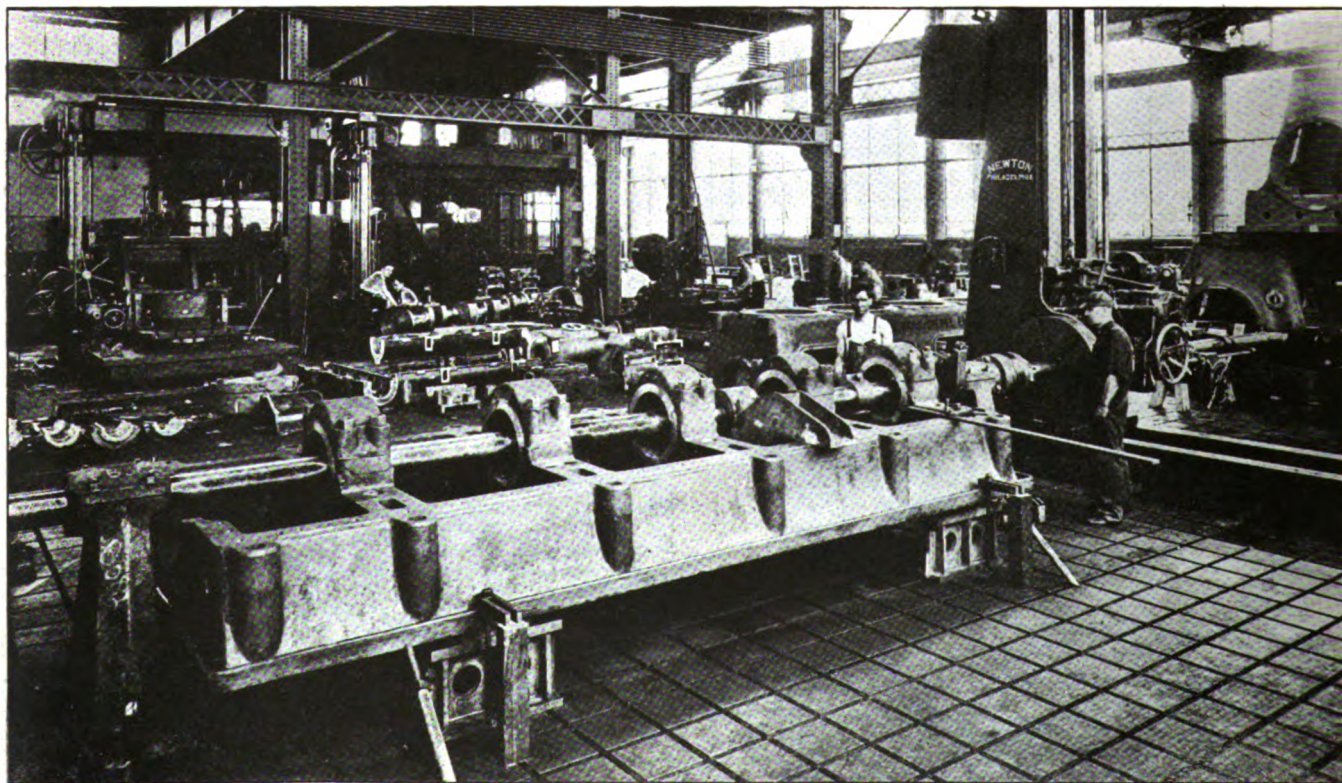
BORING A CRANKCASE FOR THE MAIN BEARINGS ON A HORIZONTAL BORING MILL
